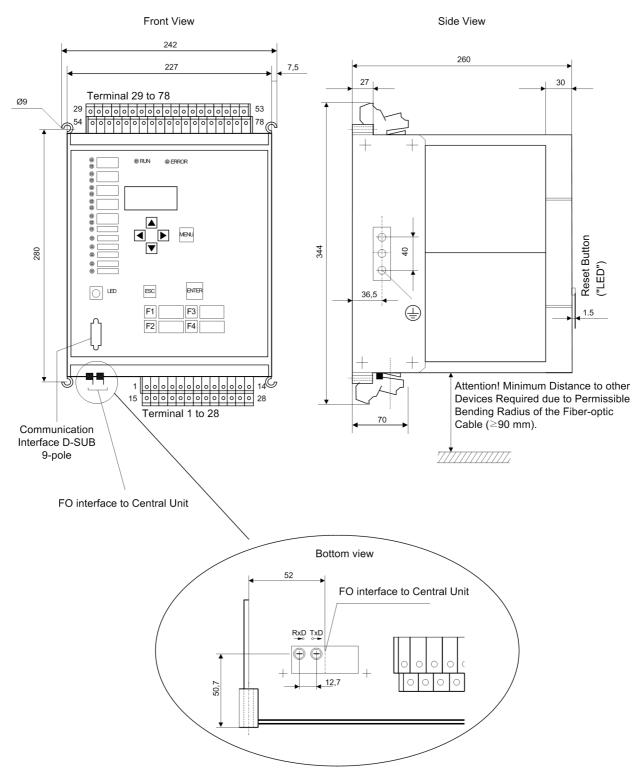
Dimensional drawing of 7XP20 for panel surface mounting 7SS523 (all dimensions in mm)
